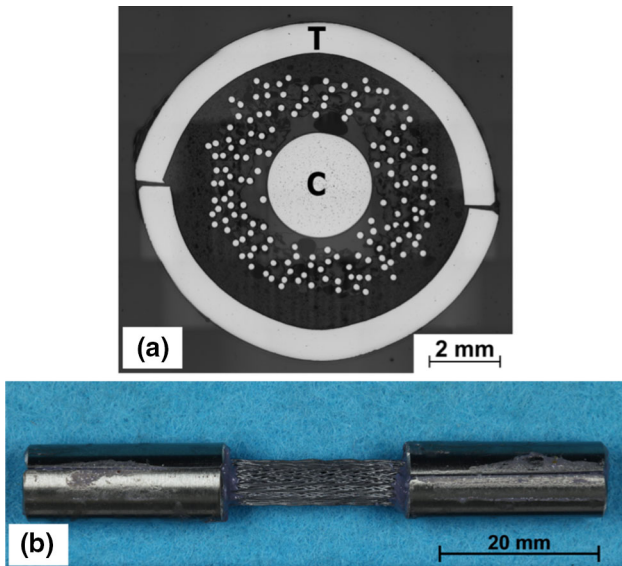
Tensile test sample with grips: (a) cross section of the grip with steel core (marked with “C”) and half tubes (marked with “T”) and (b) sample showing gage and grip sections.
